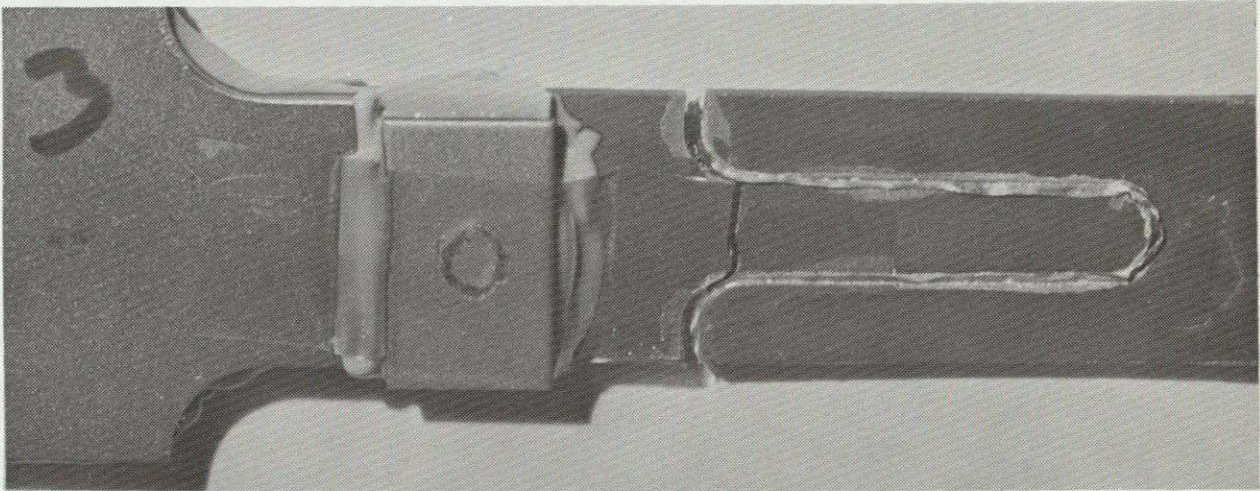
BRAZED FINGER JOINT; SPECIMEN NUMBER 3
